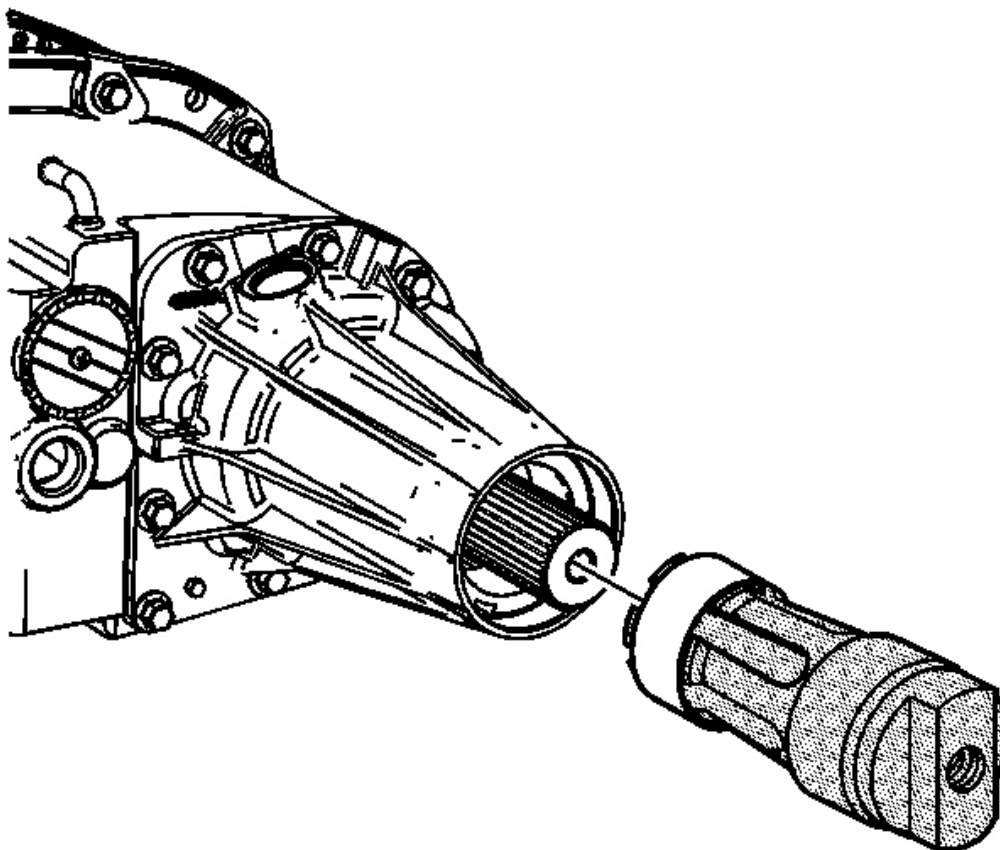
Installing Front Output Shaft Seal With J 45326
